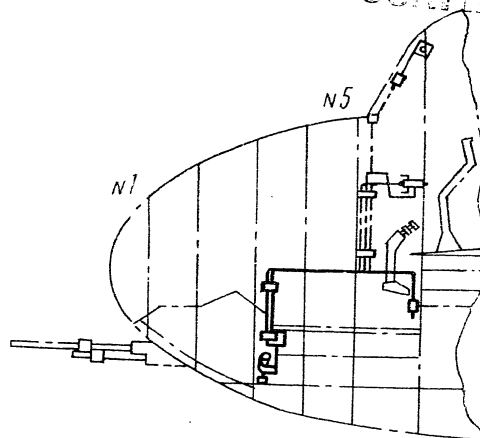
Layout of Hydraulic Units of Ventral Container Door Panels on Helicopter
